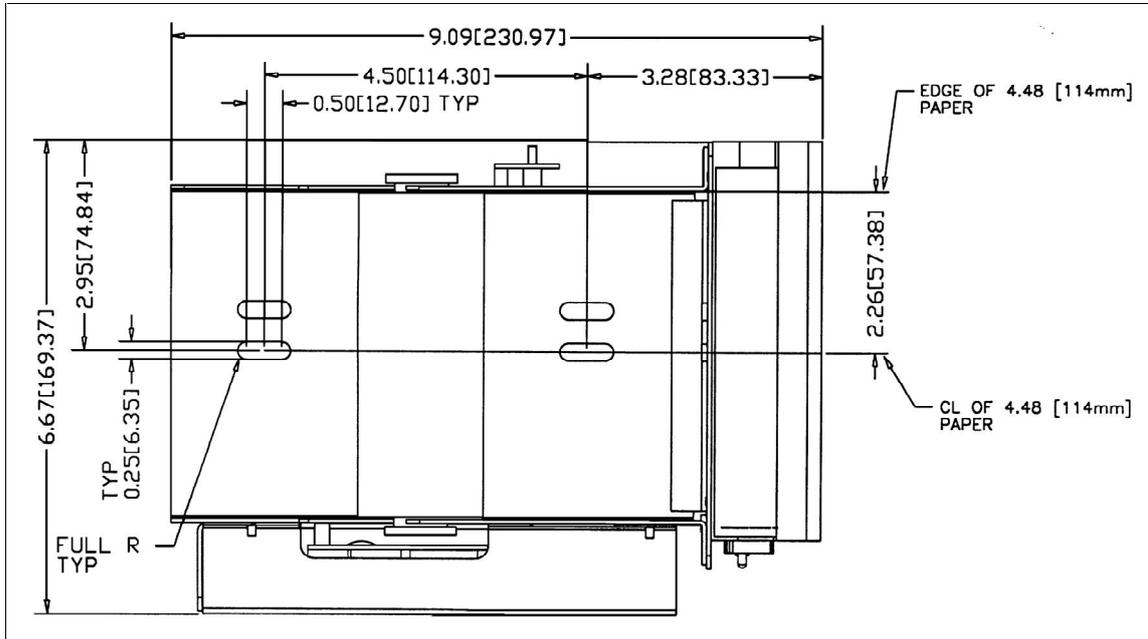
MTP-630/MTP-640 Dimensional Drawing with Mounting Holes (Top View)
